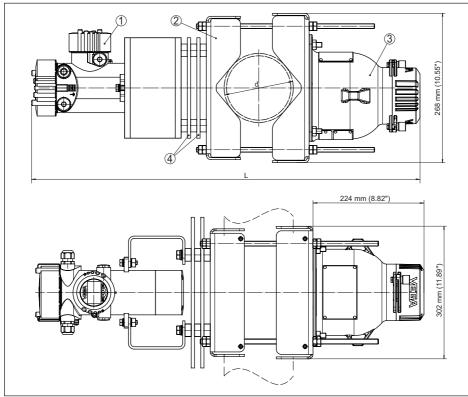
Mounting bracket with horizontally mounted sensor and heat protection kit (with VEGASOURCE 81, 82)
